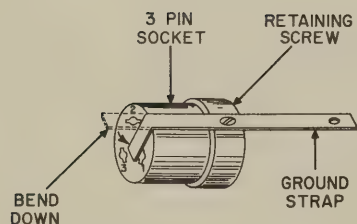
HOW TO ASSEMBLE THE PROBE HEAD
